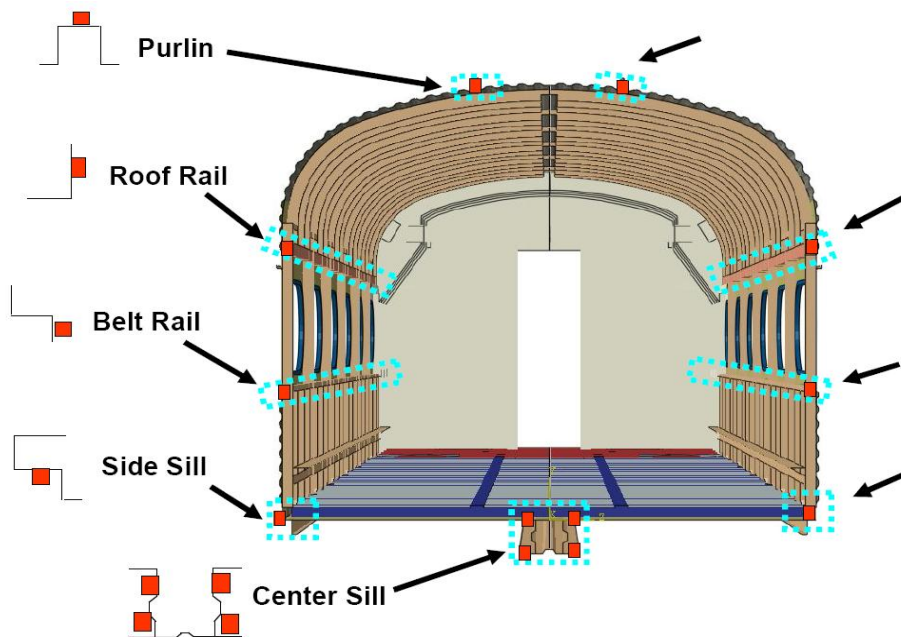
Strain Gage Application Locations at Cross Sections 1 through 5
